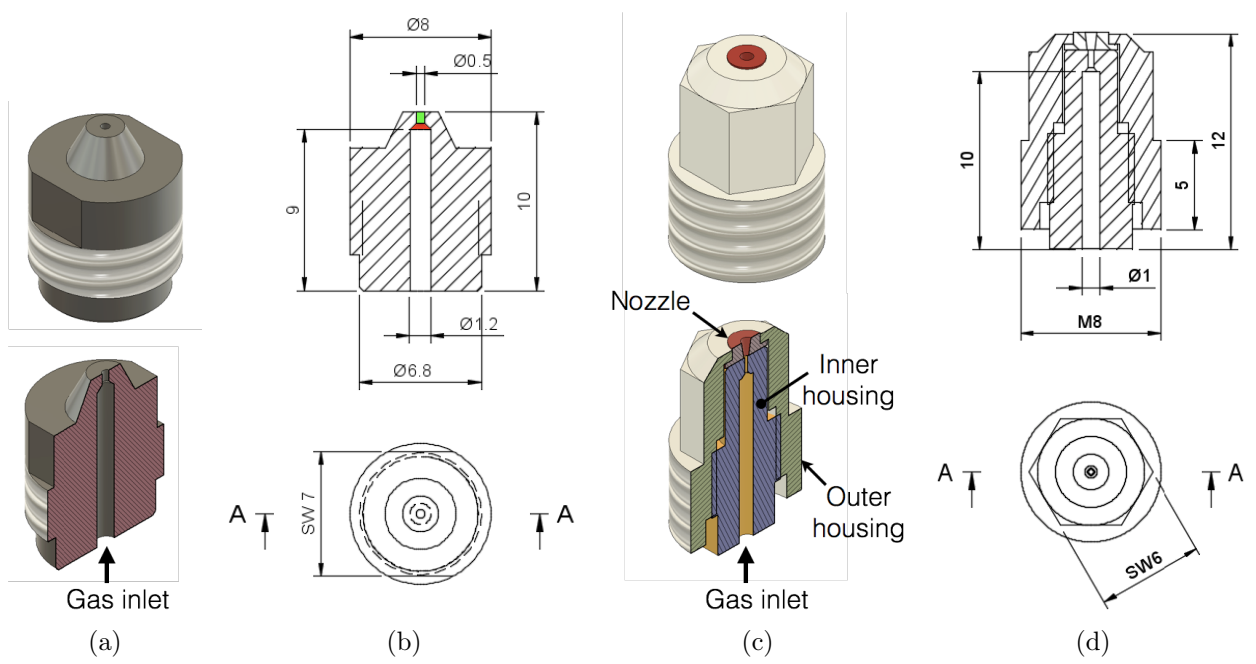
(a) 3D view of the subsonic nozzle along its cross section, (b) its important dimensions, (c) 3D view of the transonic nozzle assembly, where the nozzle (Hutblende) is mounted inside a housing because of its small dimensions, and (d) the dimensions of the nozzle housing.
